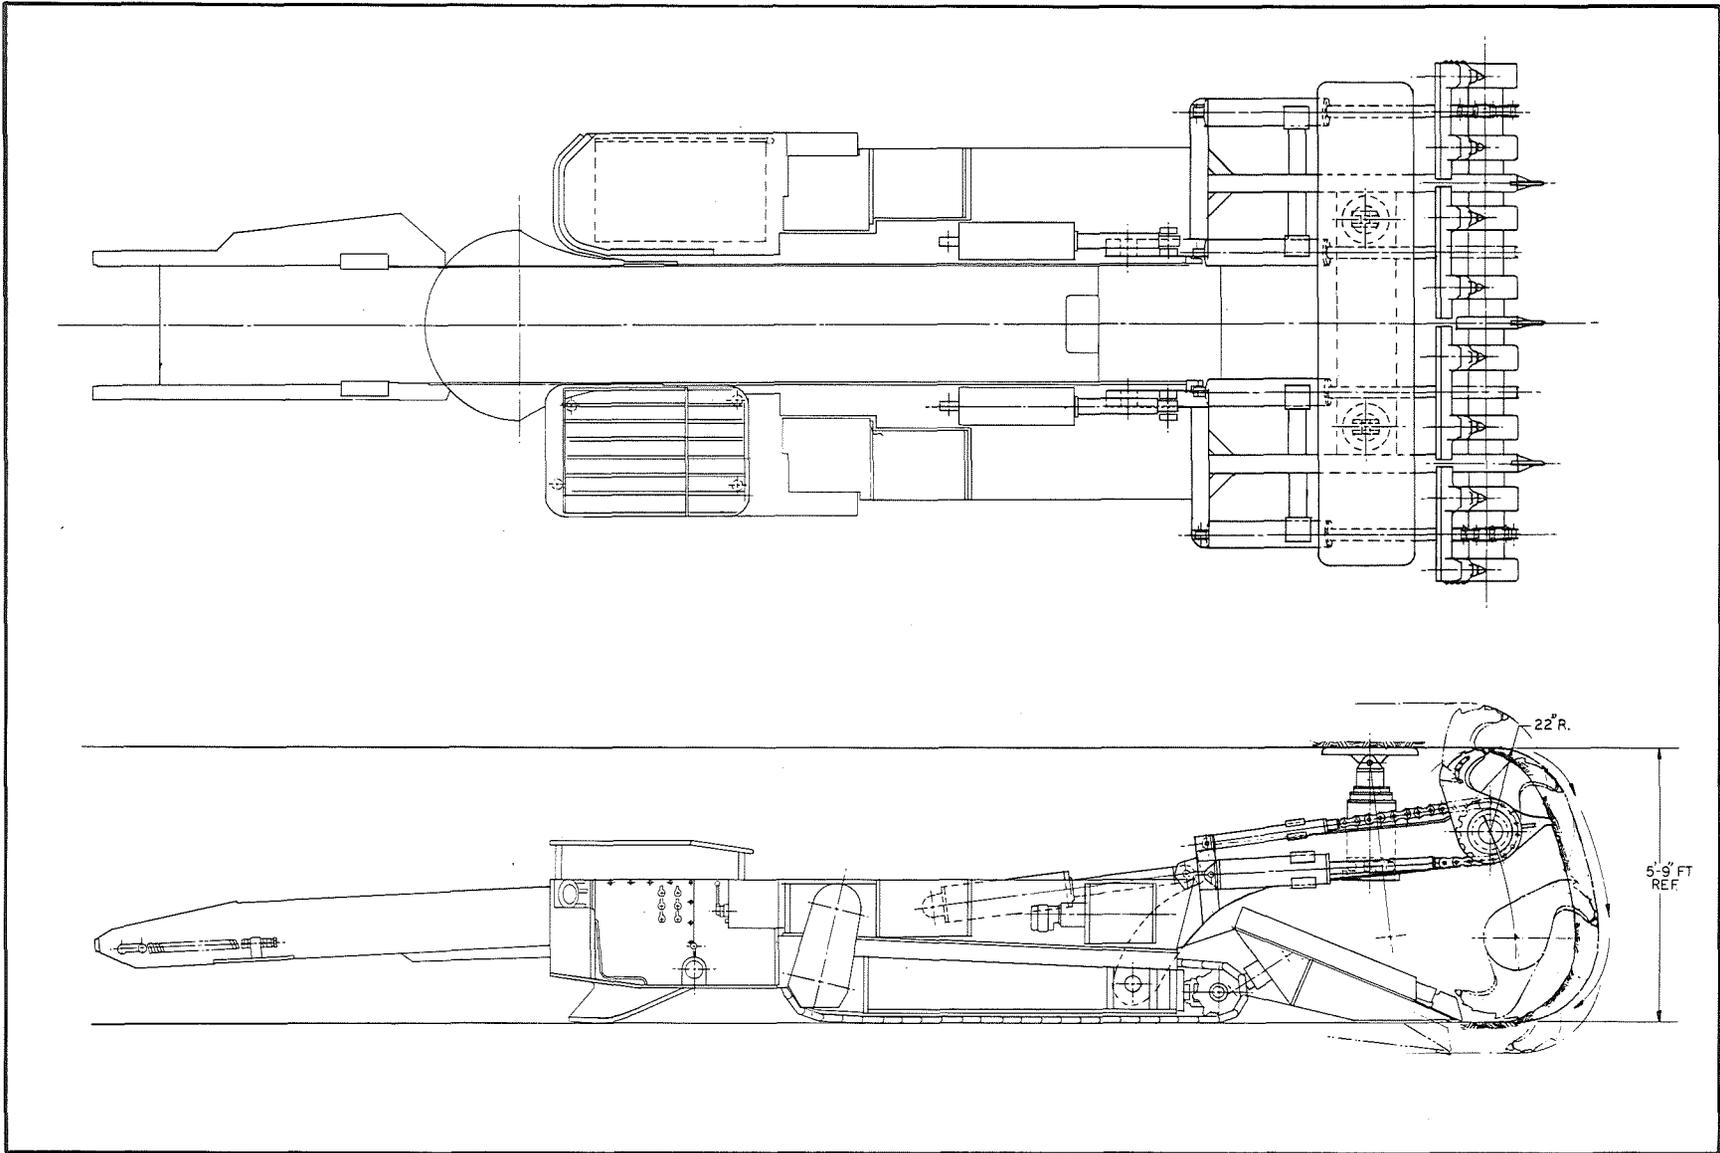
LAYOUT DRAWING, SELF-SUMPING HEAD CONCEPT SHOWN ON JOY 12CM MINER
